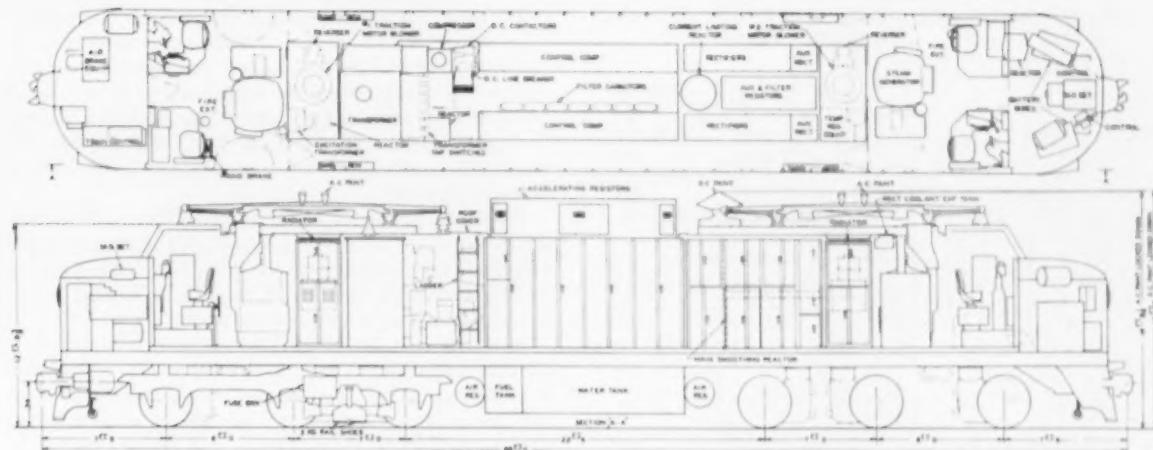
Location of principal pieces of apparatus in locomotive cab.
